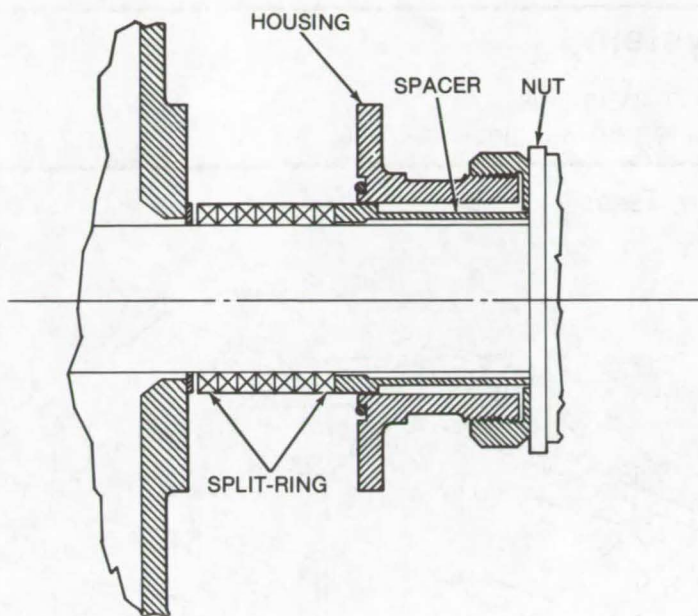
In the Housing Disconnected Position, the seal bolts are removed using a wrench which contacts flats on the housing. The housing is turned relative to the nut.
